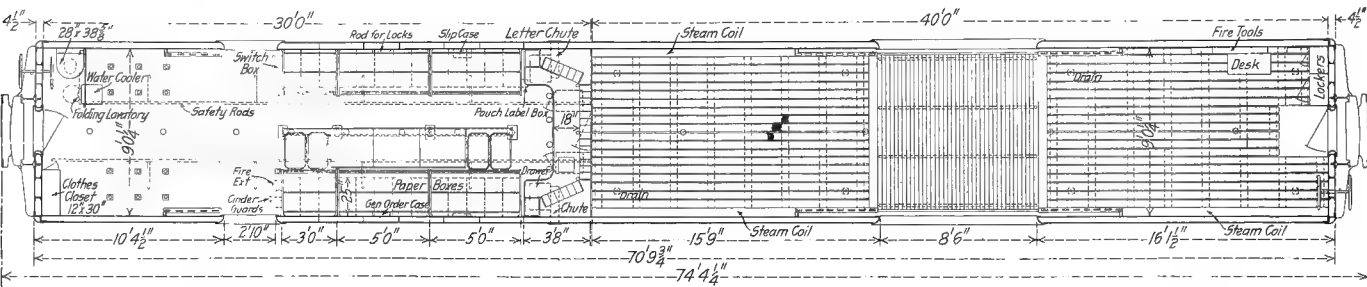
Floor Plan of Central Railroad of New Jersey Baggage and Mail Cars Shown in Figs. 130, 131 and 372-374. Builder, The Harlan & Hollingsworth Corporation.
